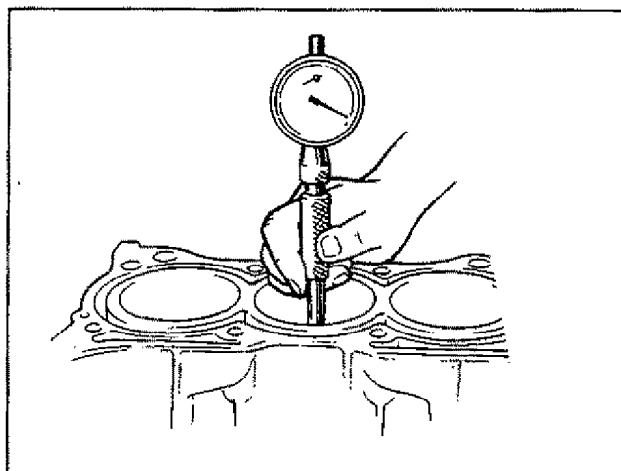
A-110 Measuring Cylinder Bore with Cylinder Gauge
